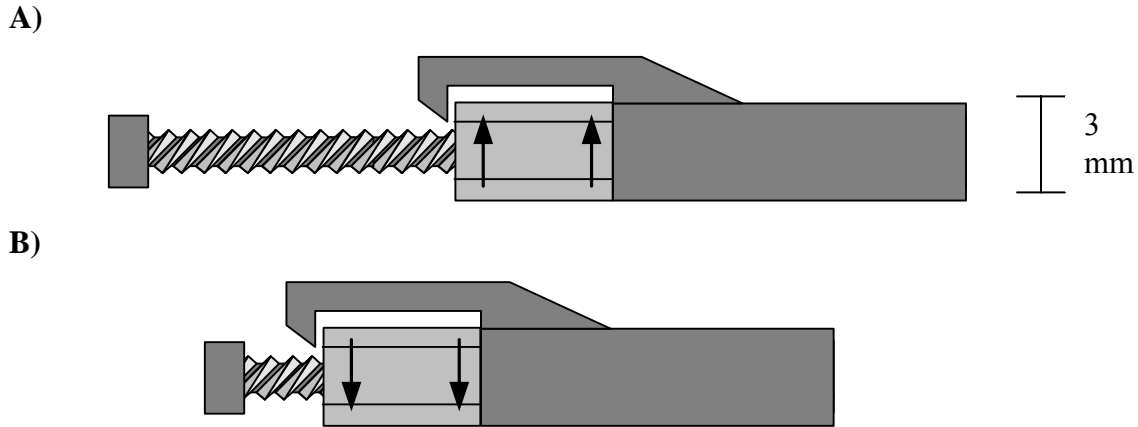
The expansion-retraction screw in the retraction, fully extended screw will be 30mm long (A) and expansion (B) settings. 1 mm in picture = 0.24 mm actual.
